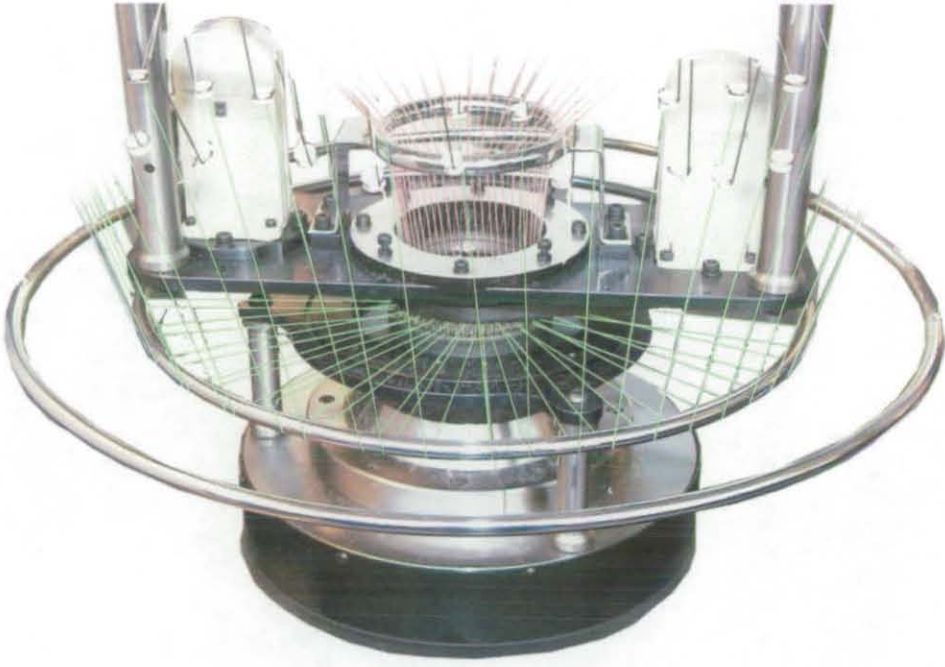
View of Patterning Mechanism With Two Rings Threaded
